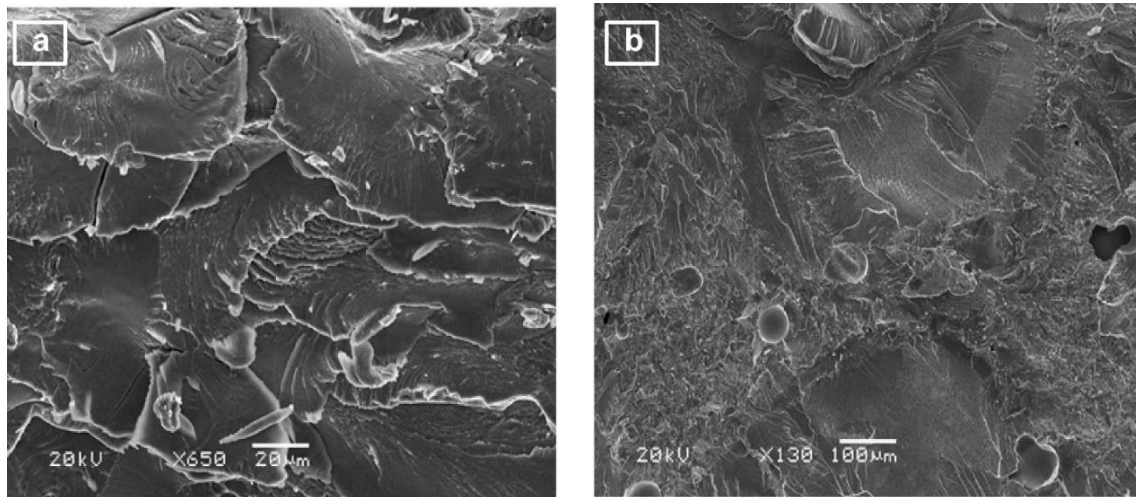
Fracture surface on the Ti6Al4V side (a) and on the NiTi side (b) of the welded joint.
